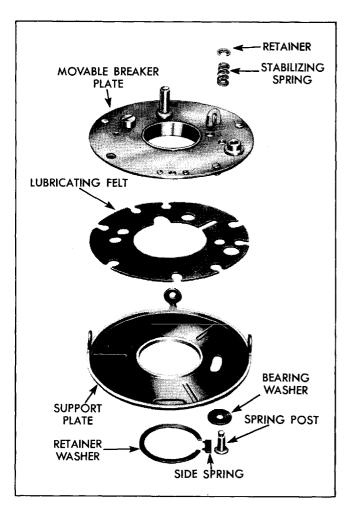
Vacuum Advance Breaker Plate Assembly--Exploded
